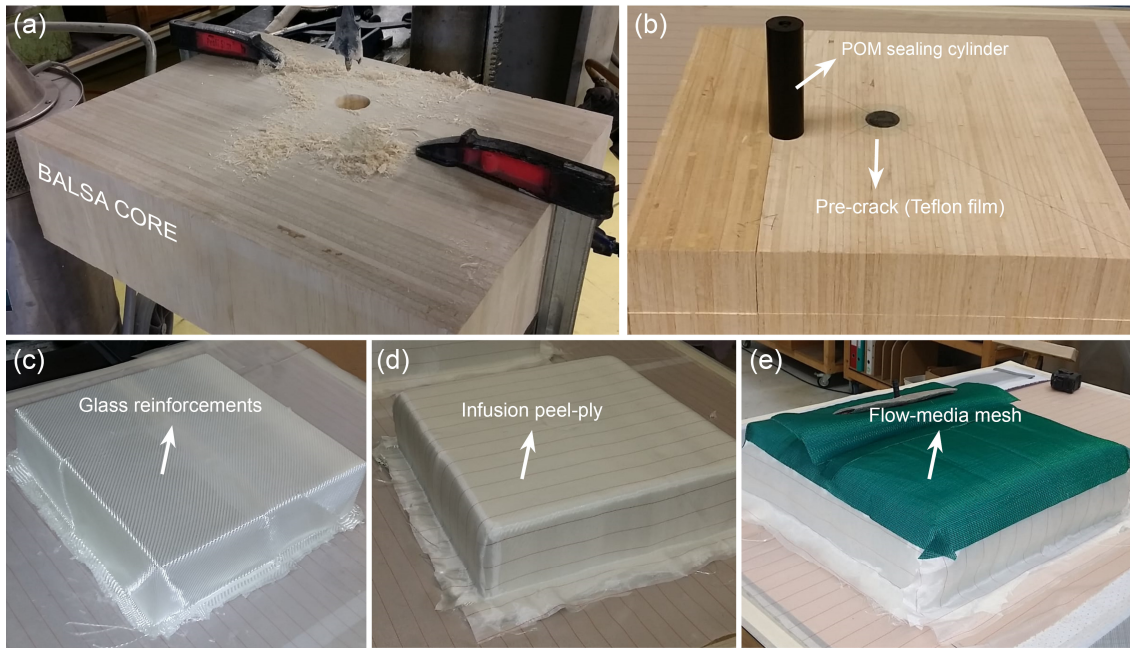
Sequence of material assembly for vacuum infusion; (a) perforation of hole in balsa wood, (b) introduction of POM sealer inside drilled hole and pre-crack placement and placement of (c) glass fiber-reinforcement layers, (d) infusion peel-ply and (e) flow media mesh.
